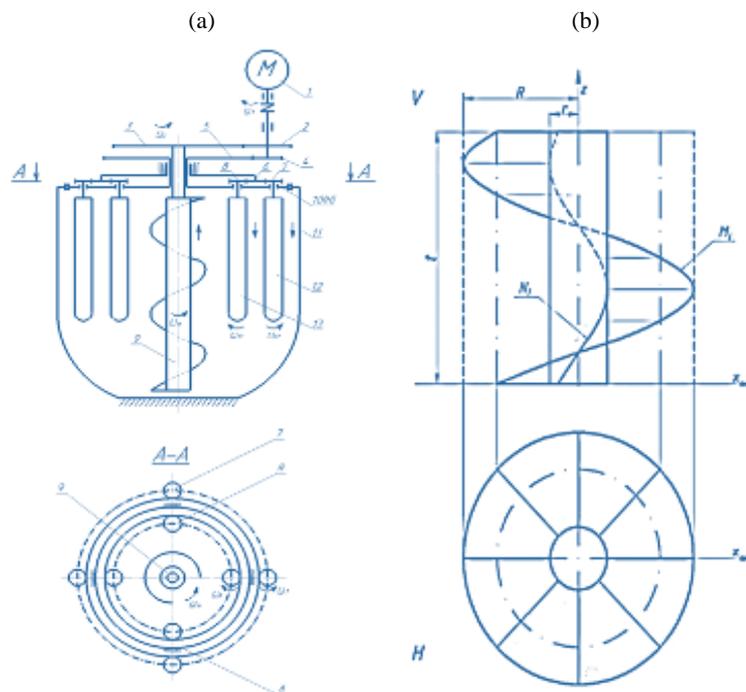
Kinematic diagram of the mechanism a) and part of the rotary auger assembly b).
